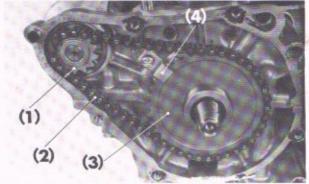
(1) Starting motor sprocket (2) Chain
